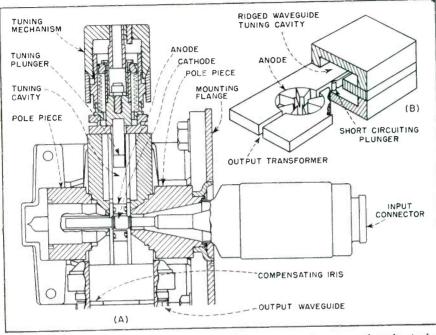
Cross-section of tunable magnetron (A) and perspective view of cavity tuning arrangement (B) illustrating use of double-ridged waveguide
